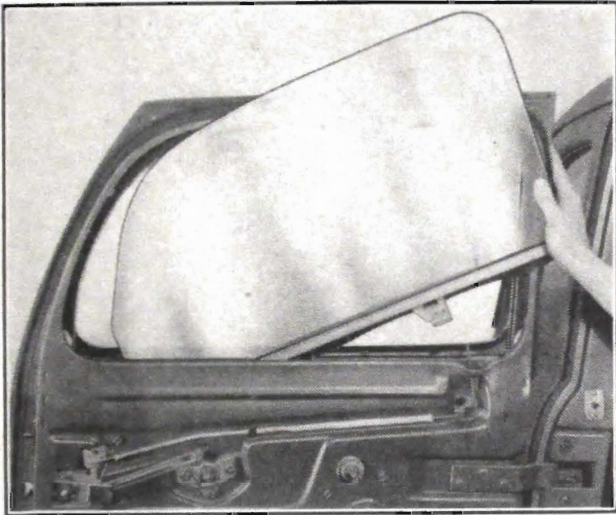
Rear Door Glass Removal—Series 40-60
